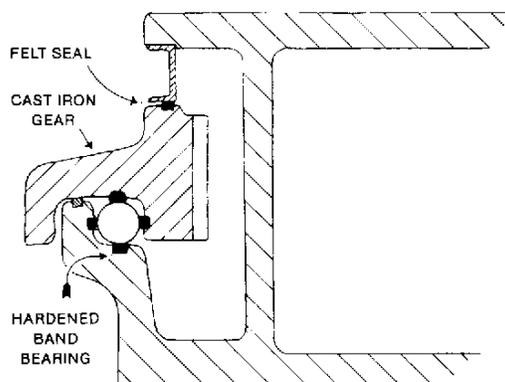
CAST IRON DRIVE WITH INSERTED RACEWAY BEARING
